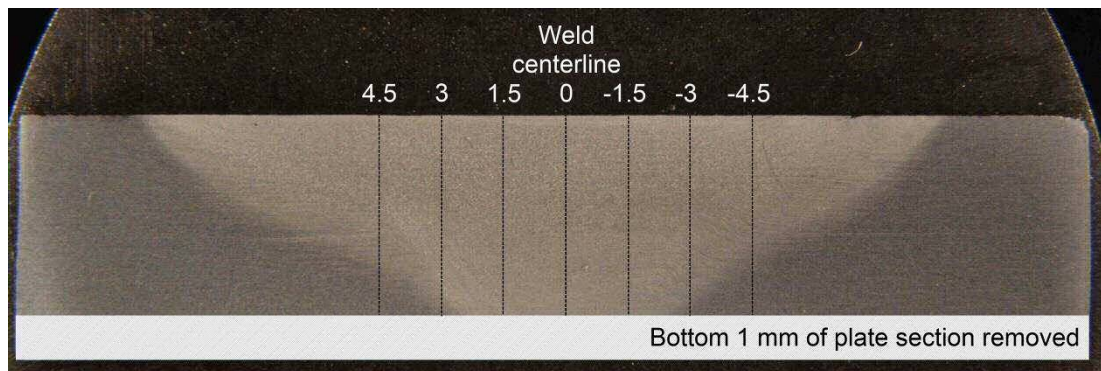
Typical macrograph showing the position of the notch axis of symmetry of the seven Charpy samples examined from each weld [Etched]
